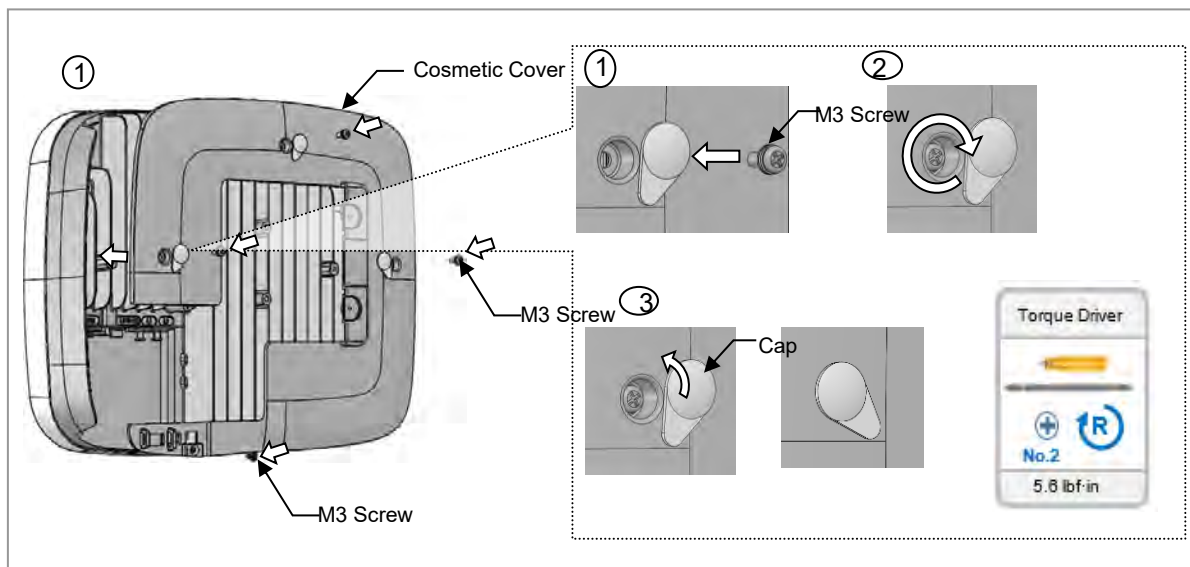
Tilted Mount - Cosmetic Cover Assembly (1)
